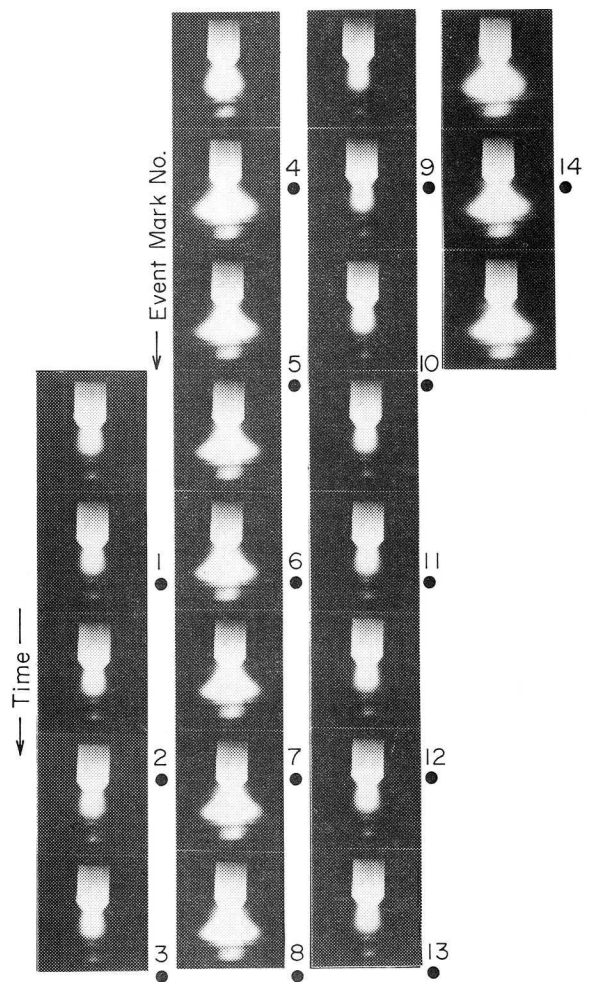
Pictures of welding images using rectangular wave current.
